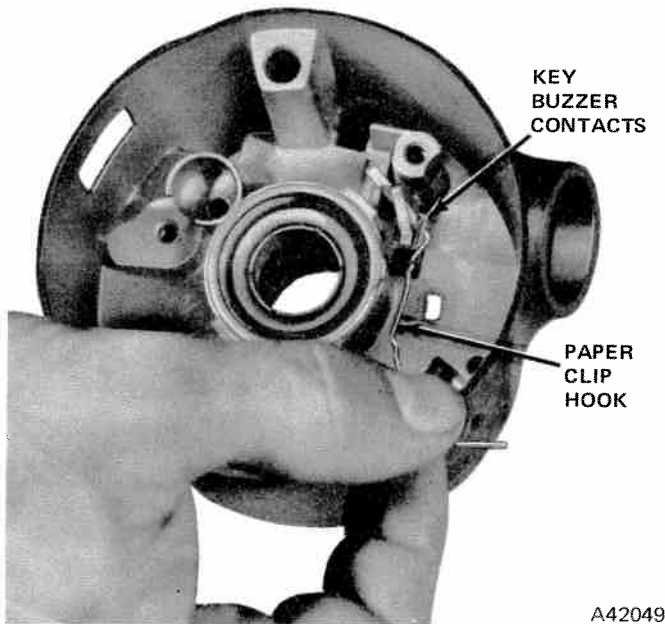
Removal of Key Warning Buzzer Contacts
